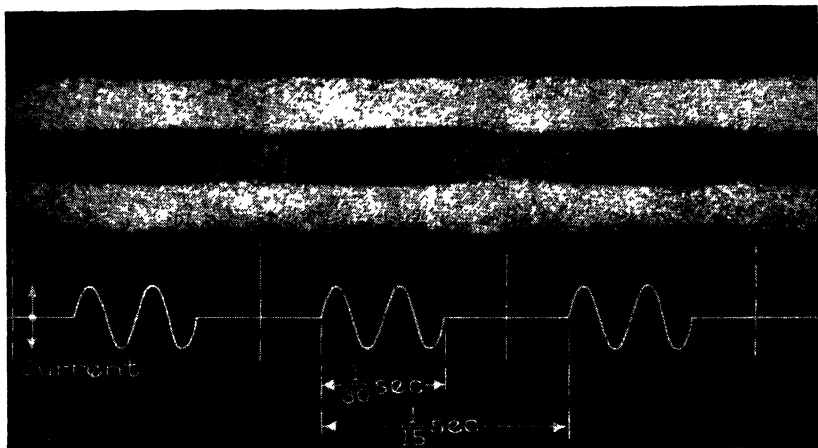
Two .037-in. Stainless-Steel Sheets, Gas-Tight Seam Welded, at 72 in. per Minute.
